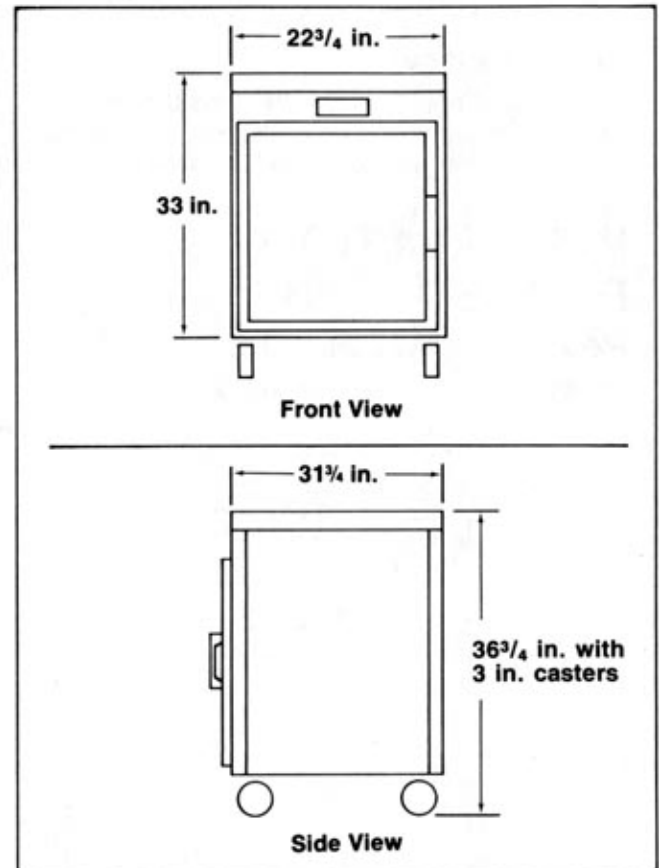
Holding Cabinet Dimensions with 3 in. Casters
